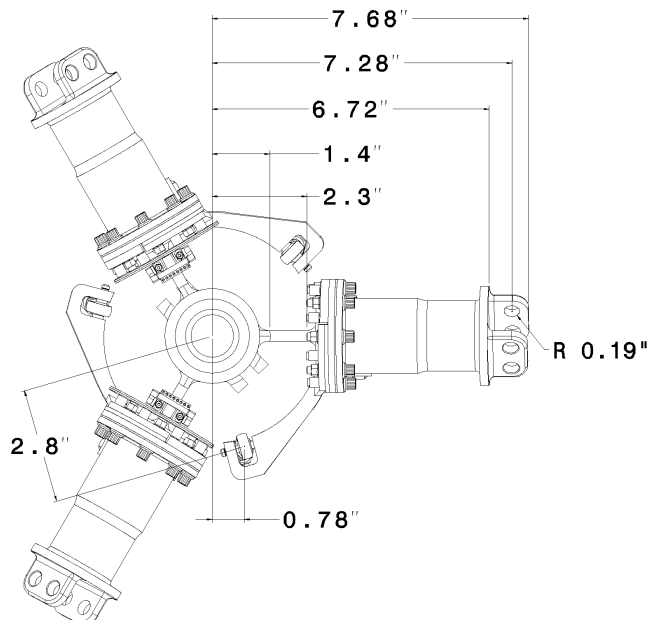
The hingeless hub top view showing the hub arm, pitch cases, and pitch horns; dimensions in inches.
